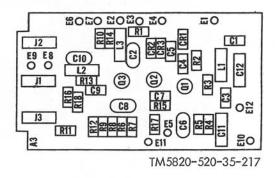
Printed circuit board 1A9A3, parts location diagram.
